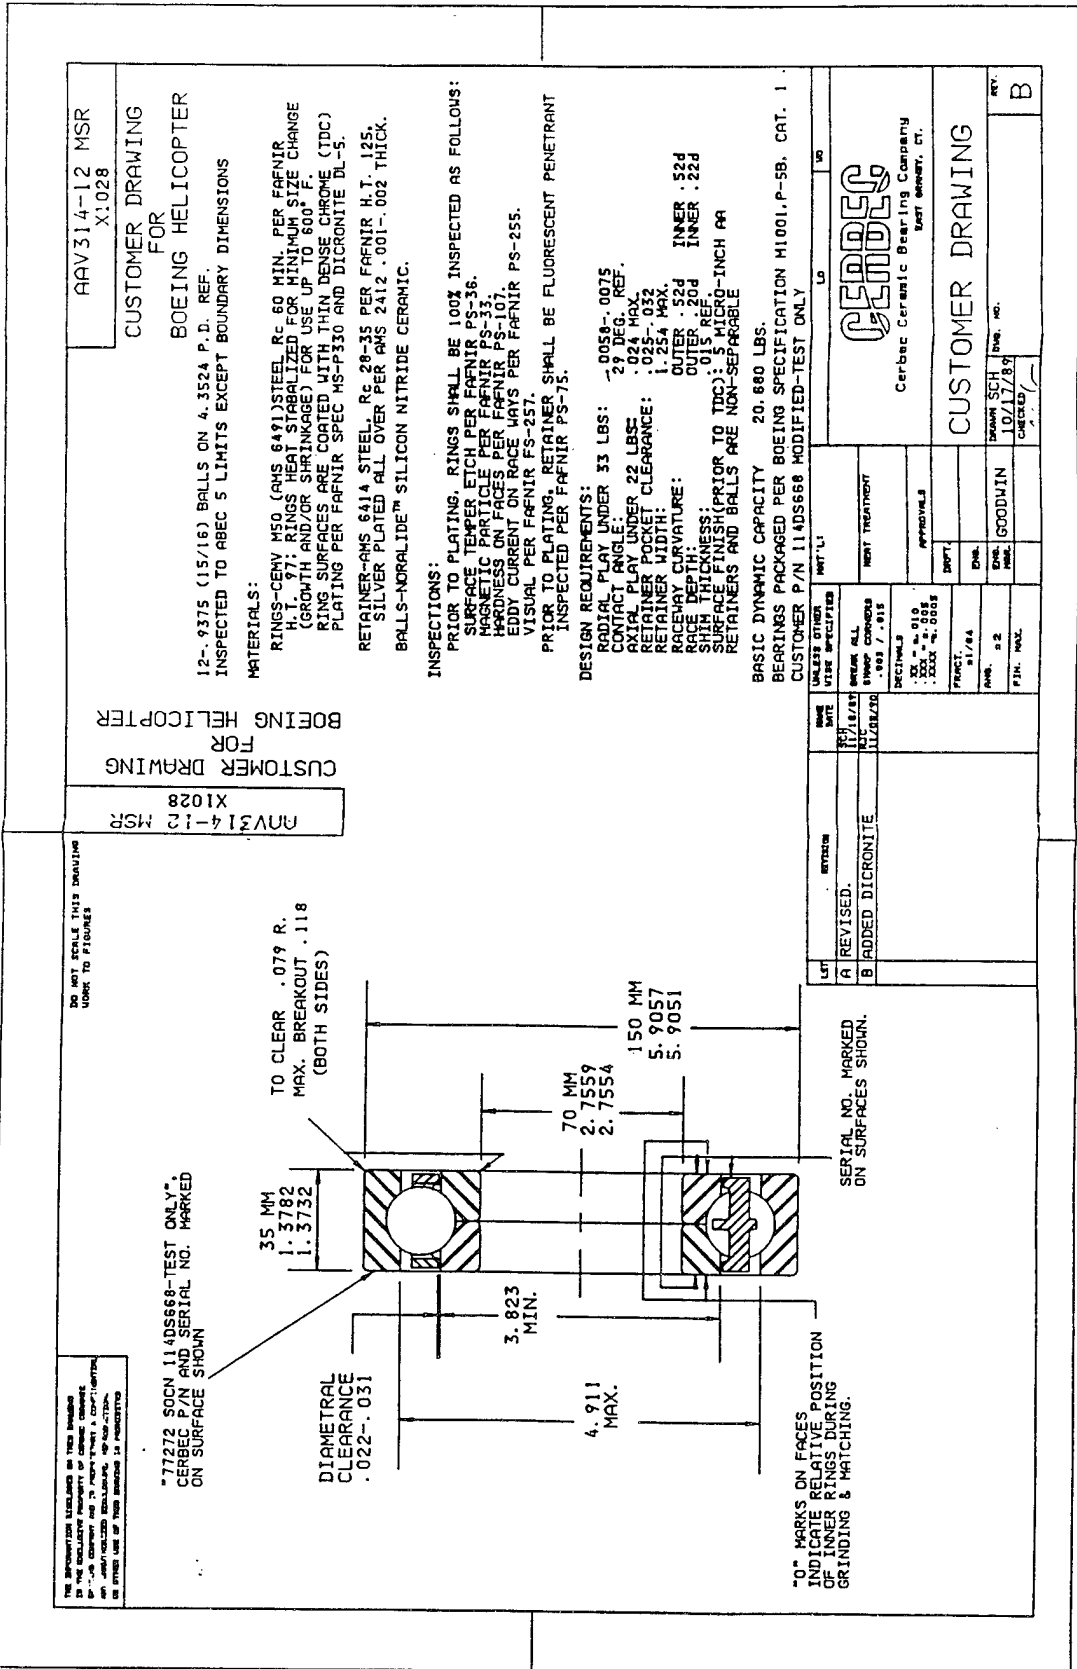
Hybrid Ball Thrust Bearing AAV314-12 MSR X1028 Manufactured by CERBEC
